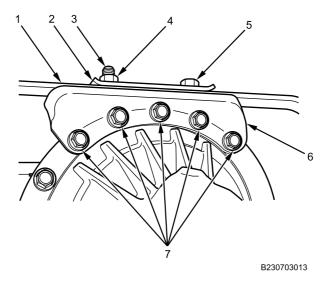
Transmission Mounting Crossmember Spring And Transmission Rear Mount Bracket.
